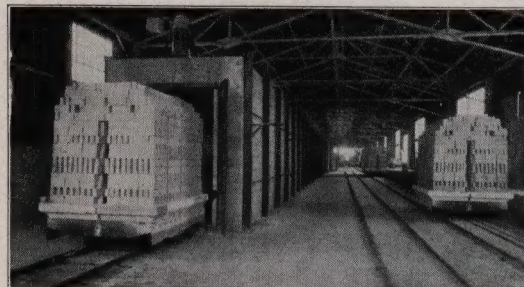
Railroad Tunnel Kiln—Burning Brick
